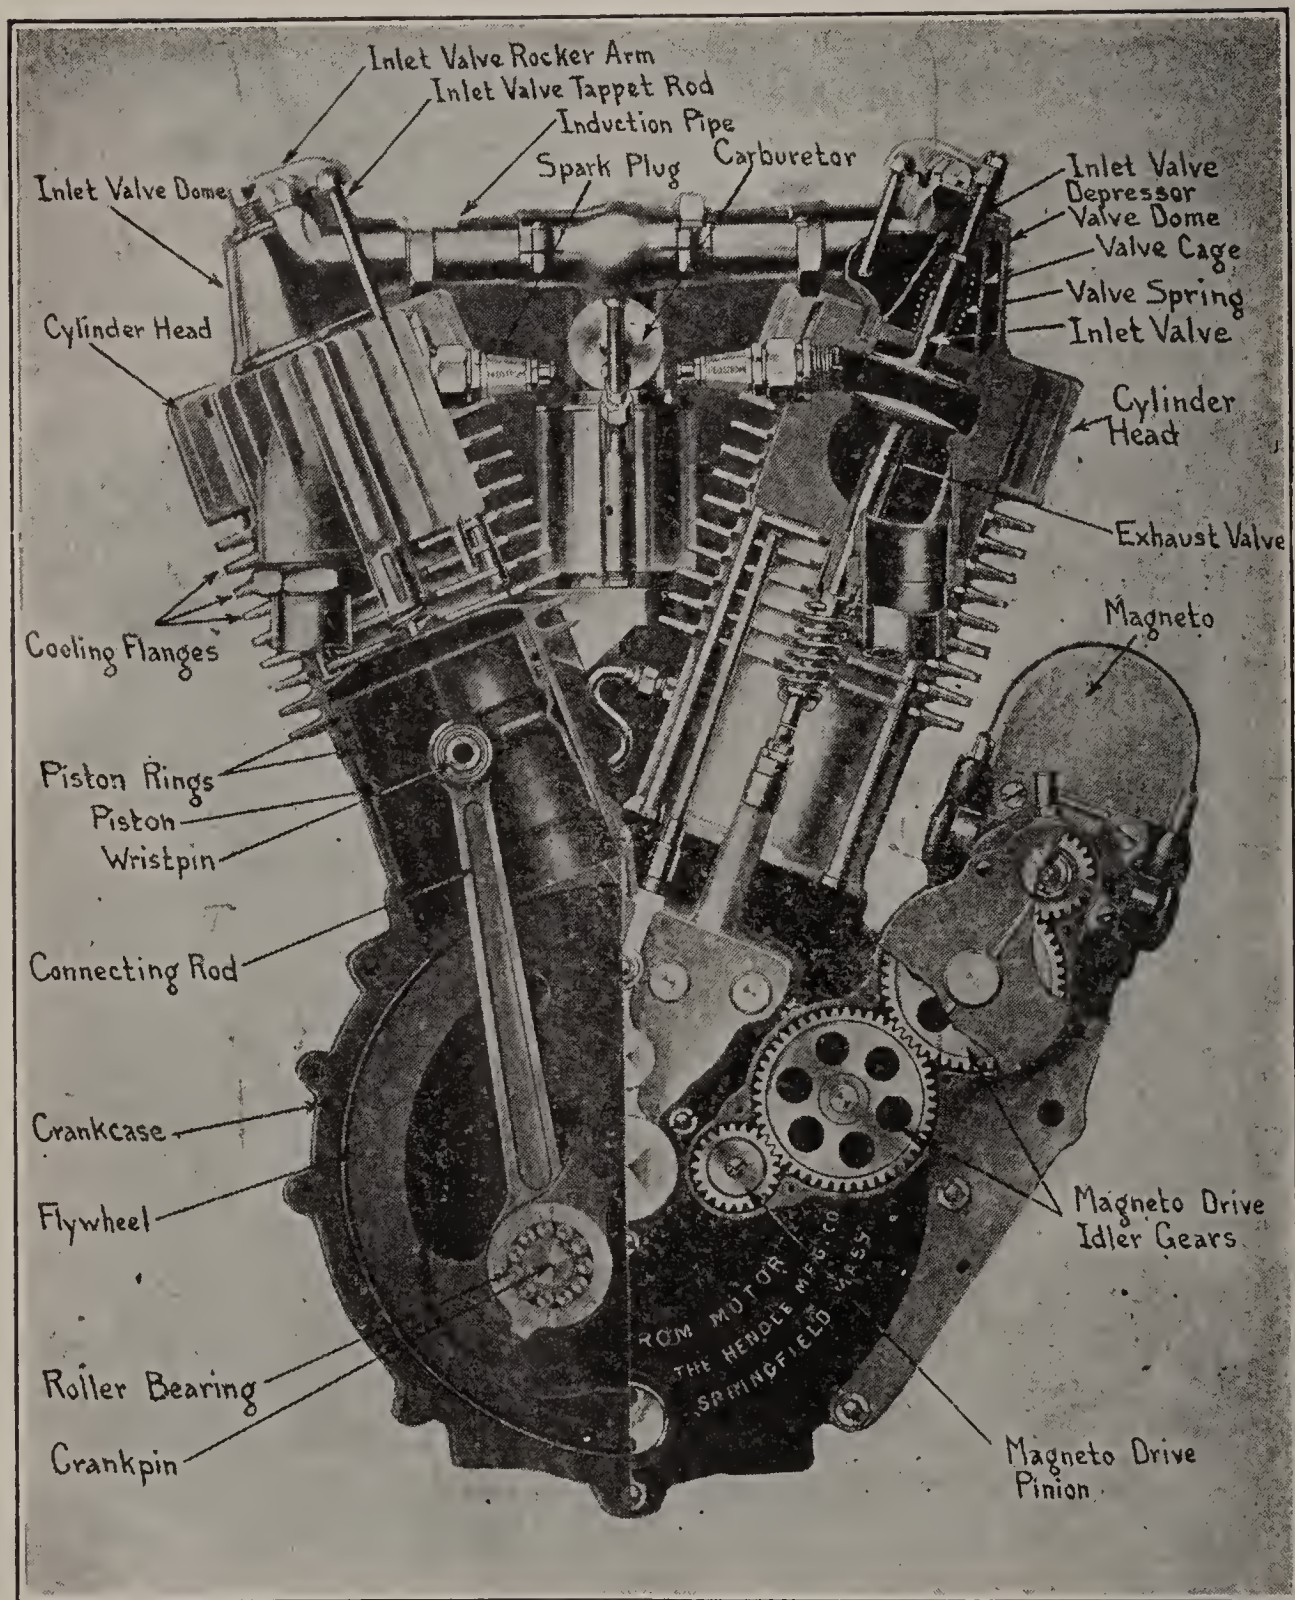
Part Sectional View Showing Arrangement of Important Internal Parts of Two Cylinder Indian Motorcycle Power Plant.
